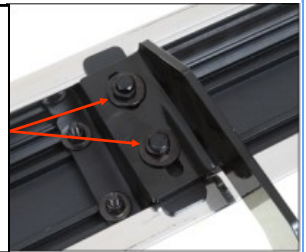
Slide & line up the U-Slider with the installed mounting brackets along bottom channel
